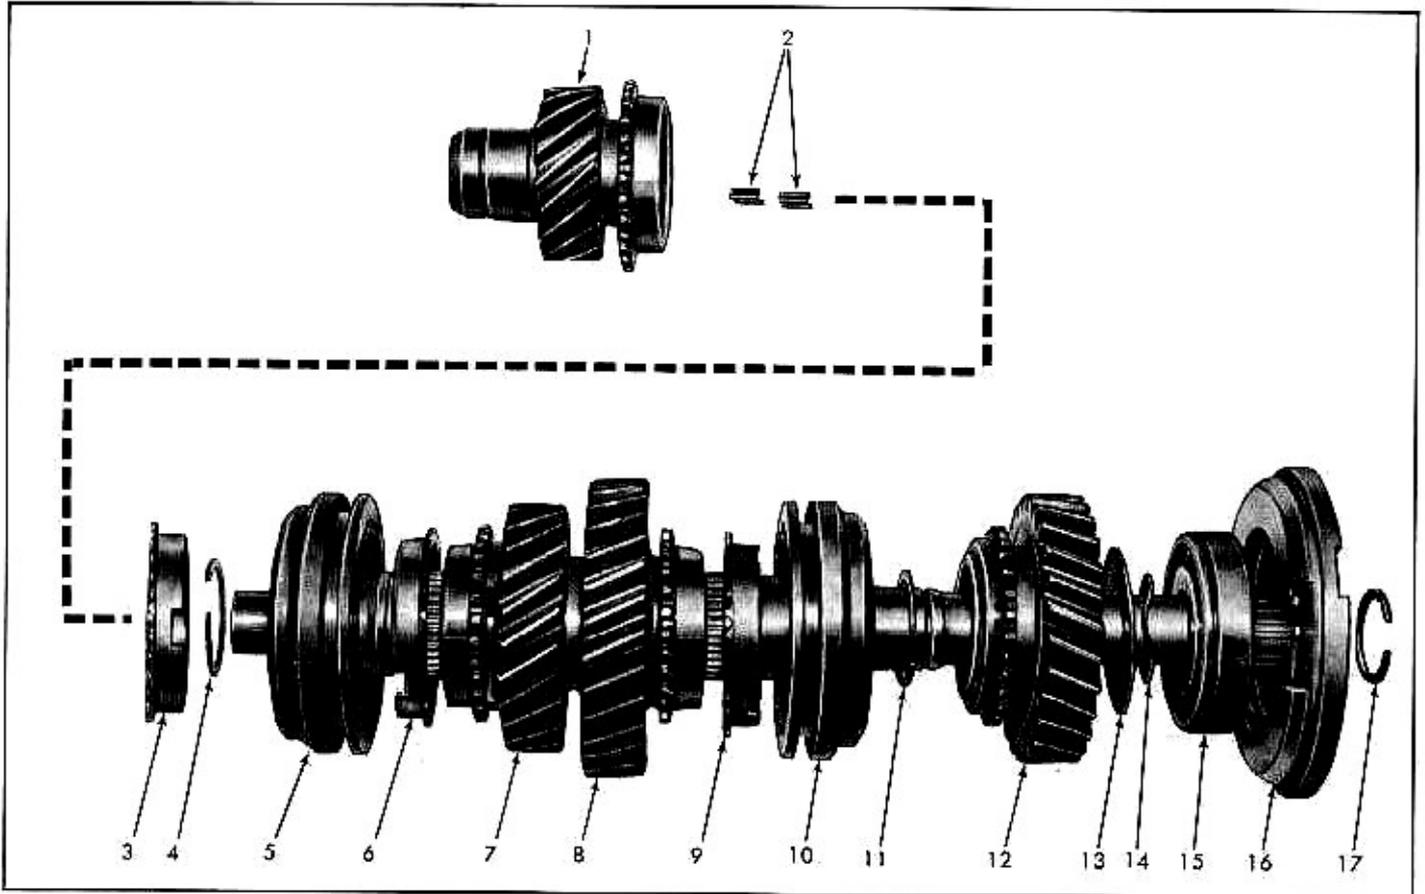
A—Clutch Gear & Mainshaft Assembly—Exploded
